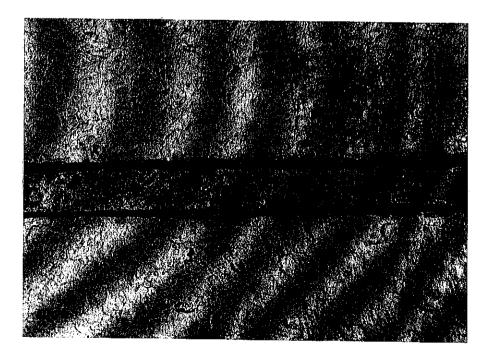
(b): Weld attack (HAZ) mild steel pipe (inside). Magnification: X0,6.
